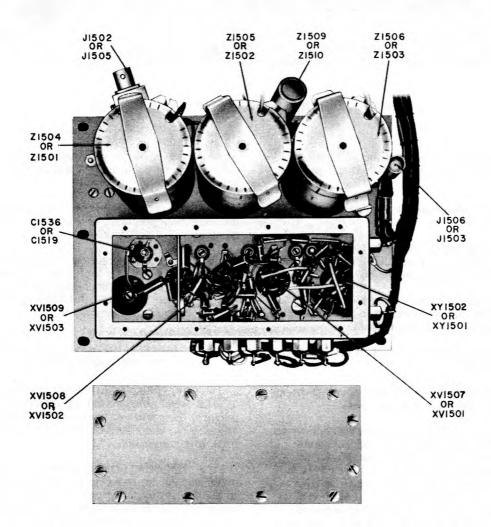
Frequency Multiplier-Oscillator CV-1171/GRN-9D, R-F Chassis, Bottom View
